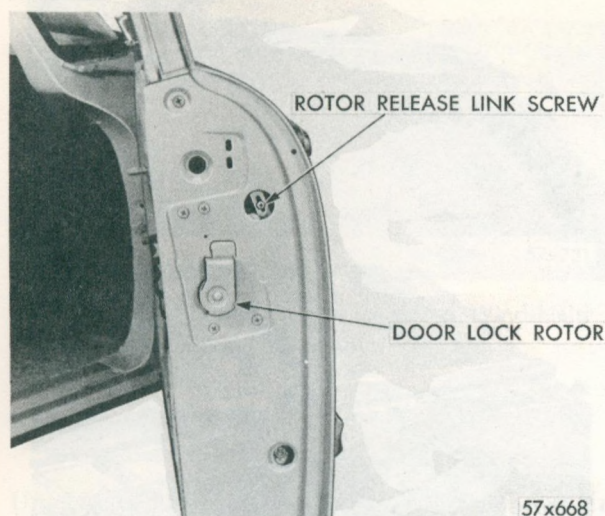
Door Lock Rotor Release Link Attaching Screw
